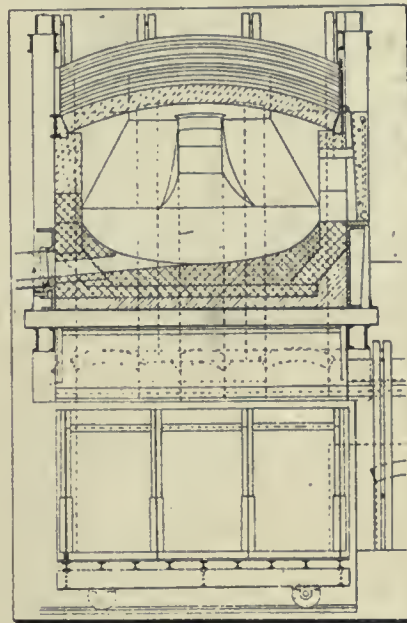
CROSS SECTION OF 60-TON BASIC OPEN HEARTH FURNACE, SHOWING SLAG POCKET CARRIAGE.
